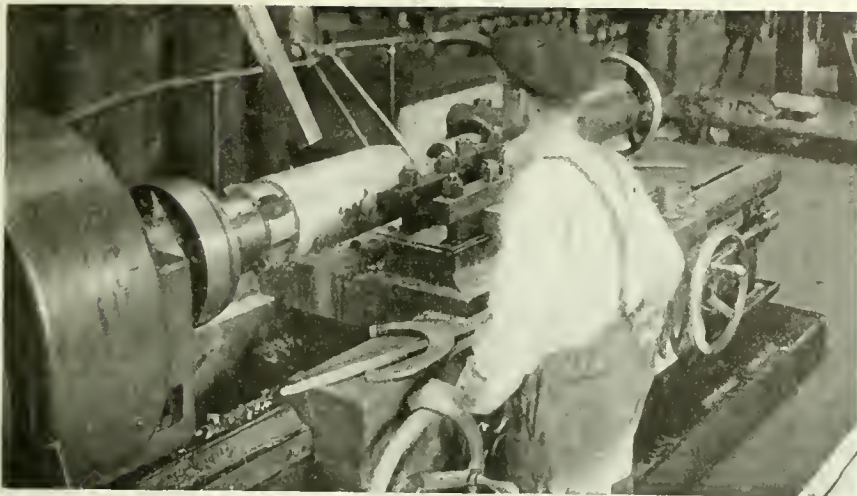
BAND TURNING MACHINE SHOWING TWO TOOLS ON SLIDE BELOW WORK.
